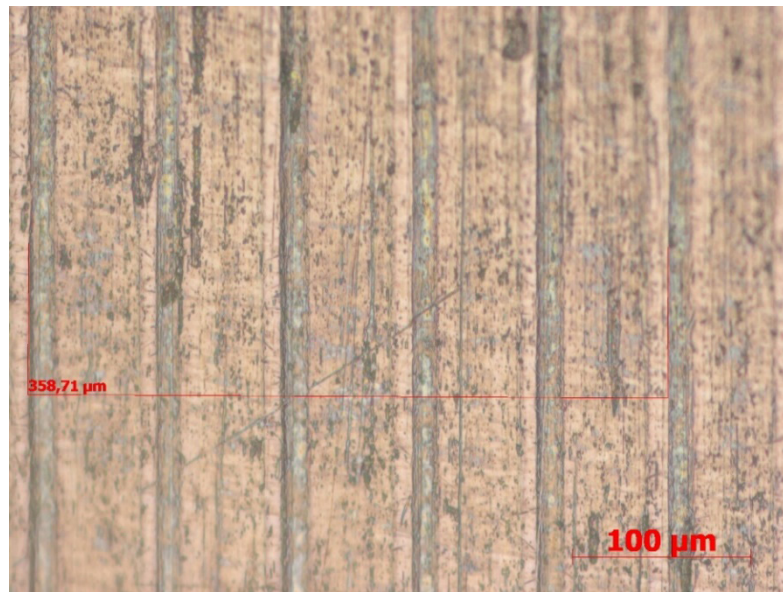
Measurement of groove pitch after finish face milling of a 0.45% C steel part
